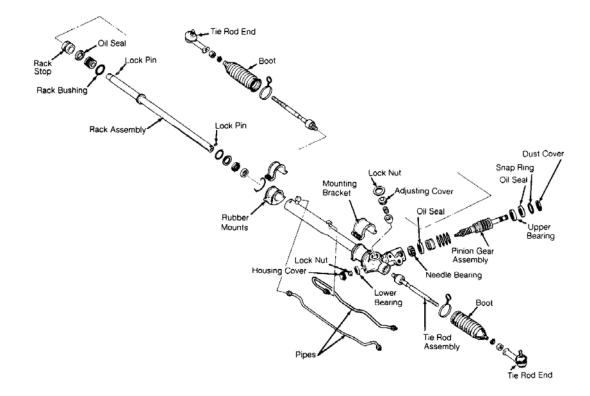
Exploded View of Rack & Pinion Steering Gear (RX7) Courtesy of MAZDA MOTORS CORP.
